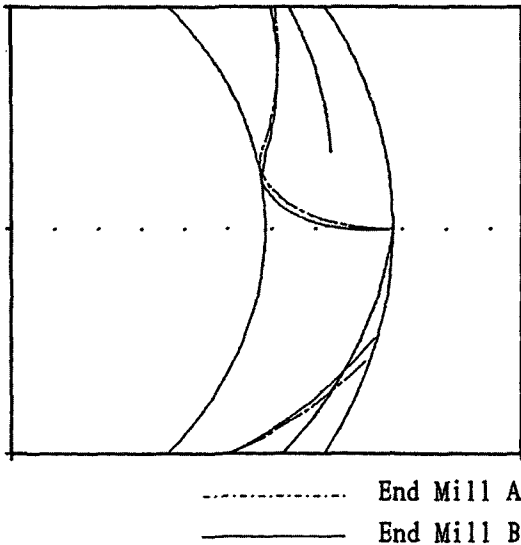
Detail Observation of the End Mill Rake Face using Different Wheel Position with Same Wheel Geometry
